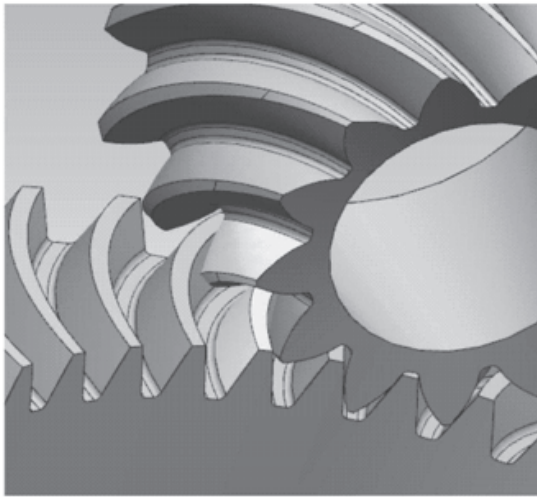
Fully worn gear tooth surface on the active wheel (Model 2).
